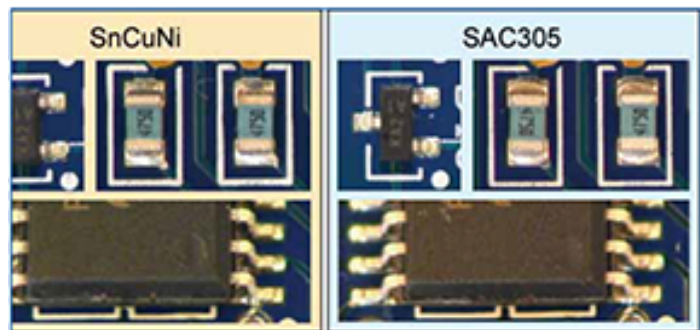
Photographs of SMT solder joints produced with a cool reflow profile. Both alloys showed good wetting and fillet formation.
